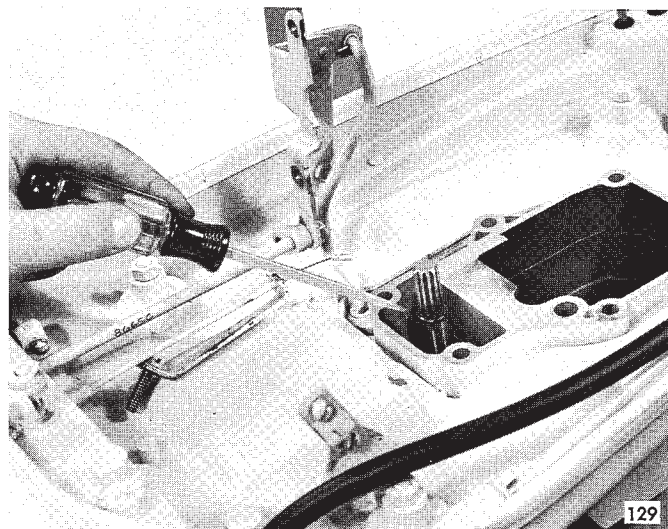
UPPER DRIVE SHAFT SEAL
